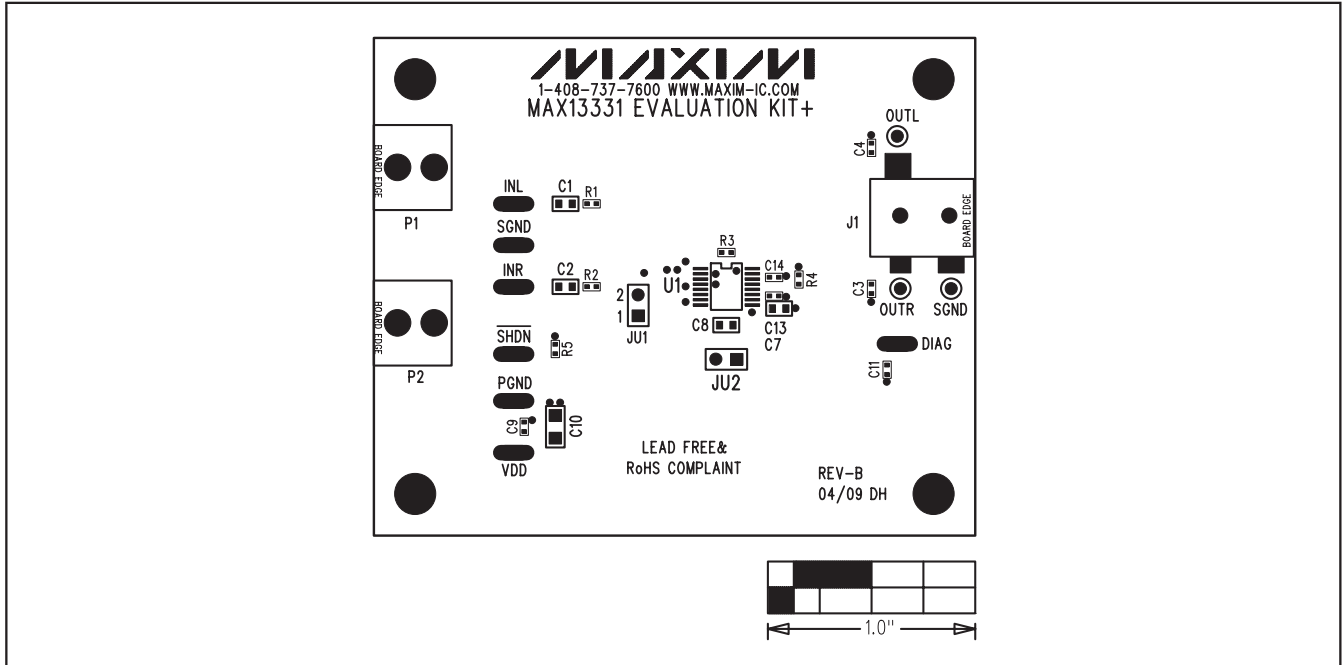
MAX13331 EV Kit Component Placement Guide—Component Side
